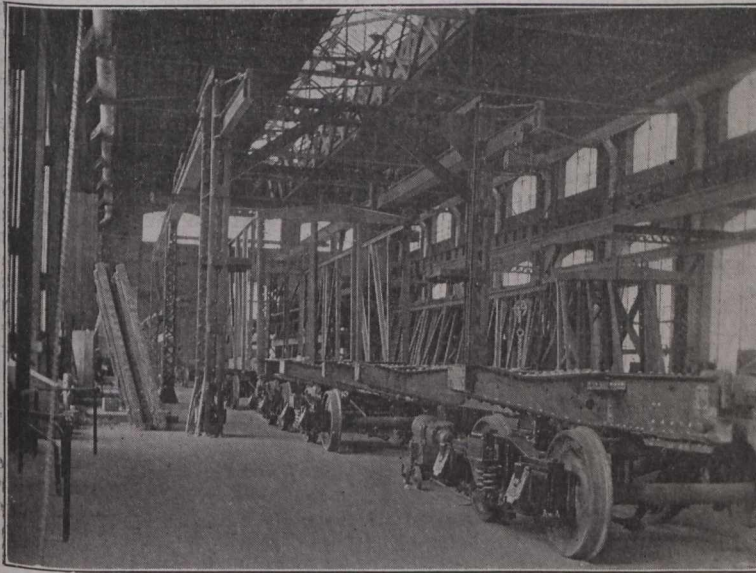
Erecting Side and End Frames on Steel Freight Cars.
